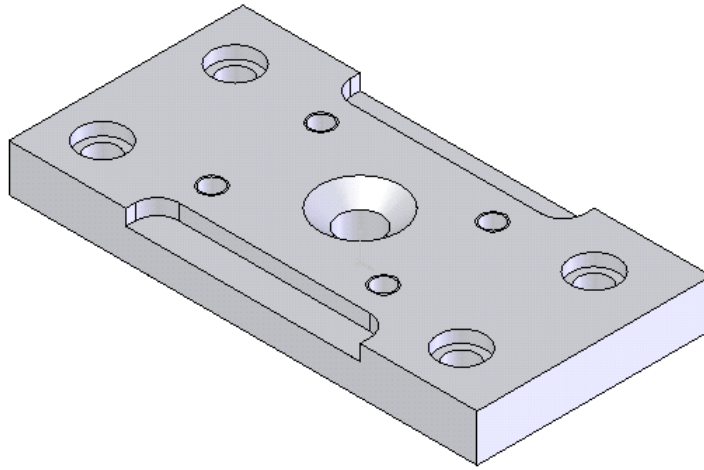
Base Plate with holes created using the Hole Wizard option
